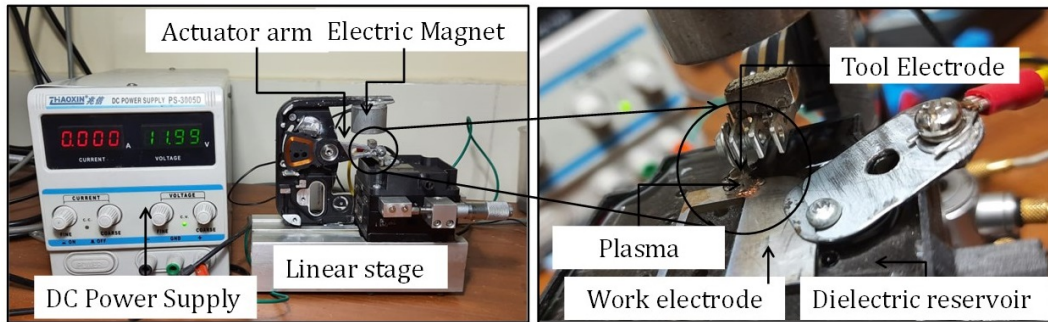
True scale working prototype of Maglev EDM; magnified view of machining zone
